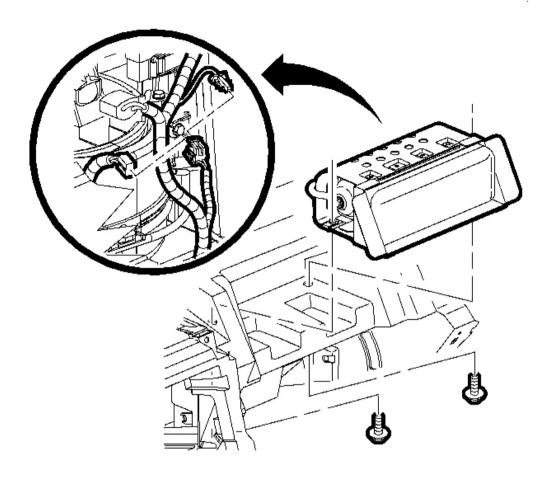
Module & I/P Carrier Retainers Courtesy of GENERAL MOTORS CORP.
